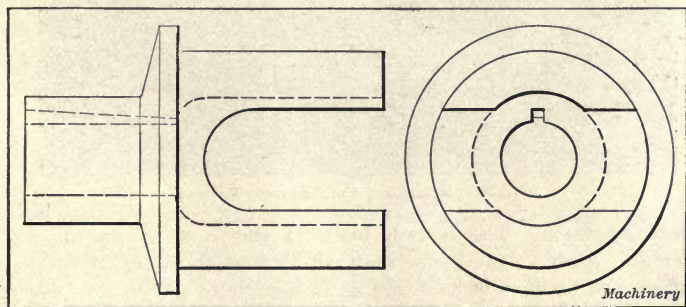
Universal Joint Yoke in which Tapered Keyway is to be Broached
